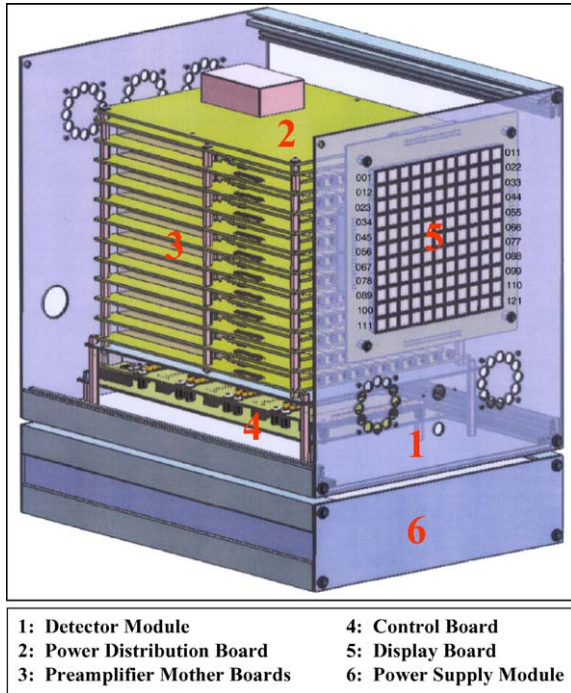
Engineering drawing of the Cosmic Ray demonstrator.
